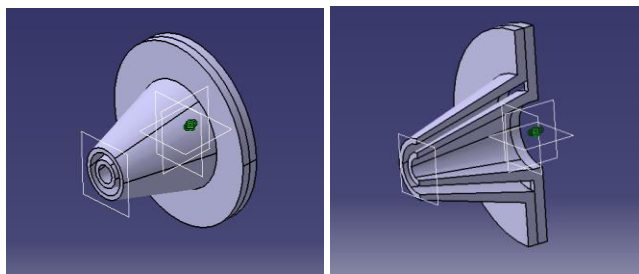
Isometric view and cut section view of circular coaxial nozzle.
